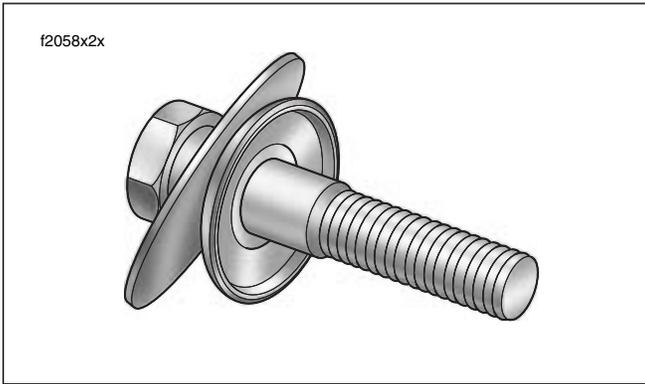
Remove Bolt, Large Washer and Lower Cup Washer (Right Side)
